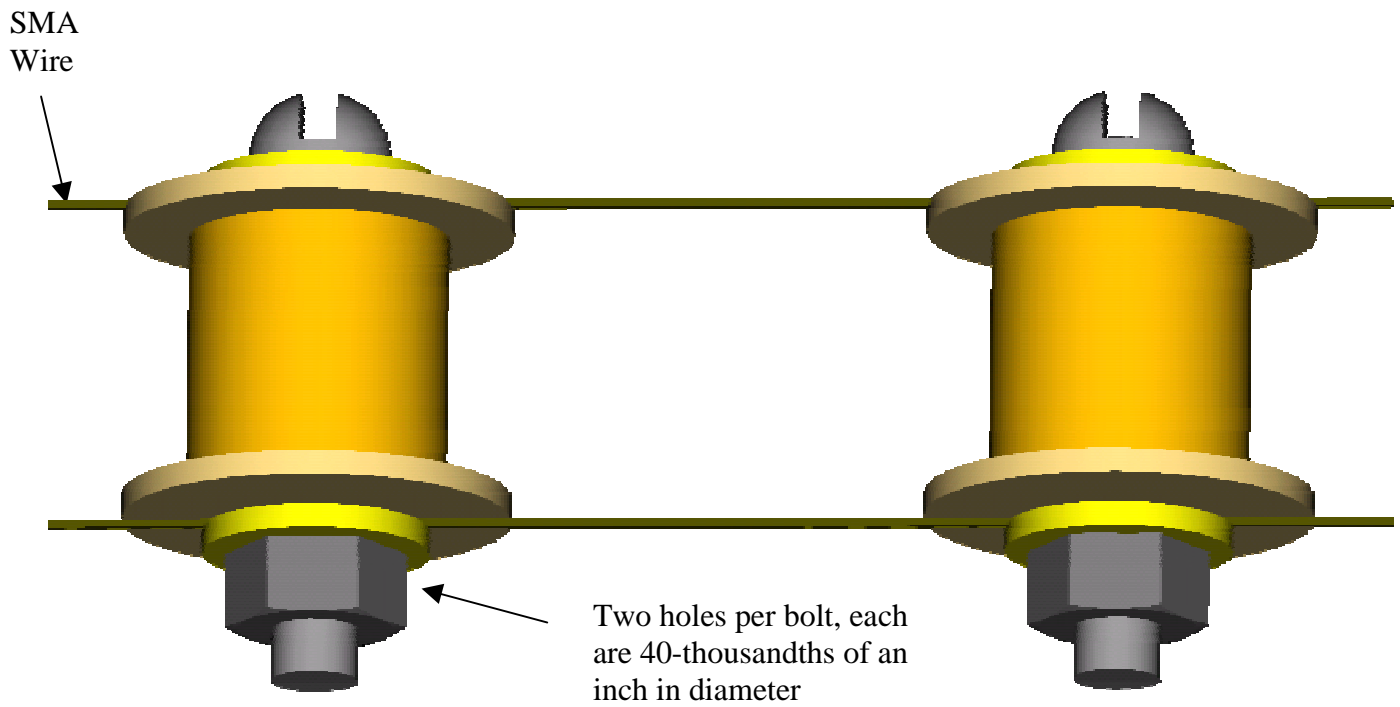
3D CAD drawing of the SMA roller chain assembly
